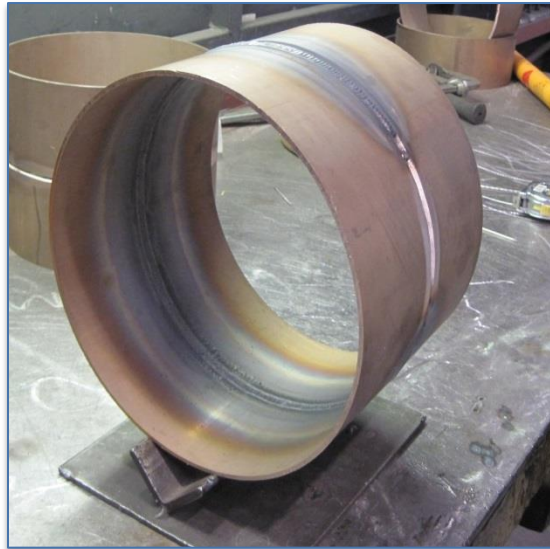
photos of actual situation while welding with and without backing gas
